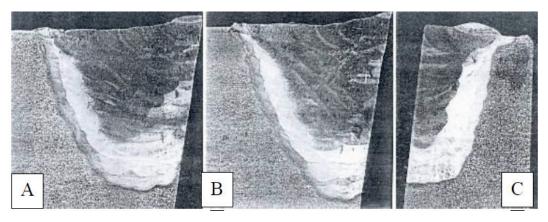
Macrostructure of weld No. 4 – cross-section A, B and C
